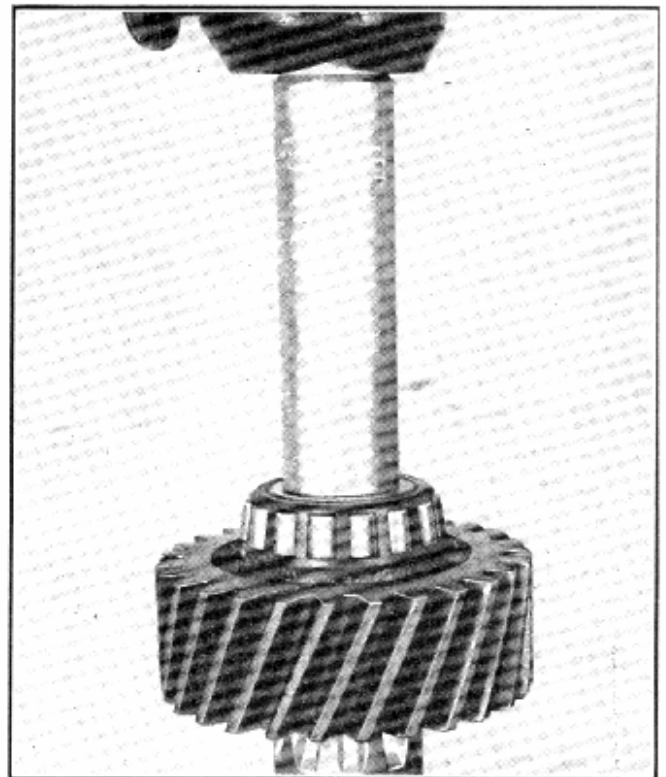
Installing Main Shaft Rear Bearing, Tool No. J-1718
